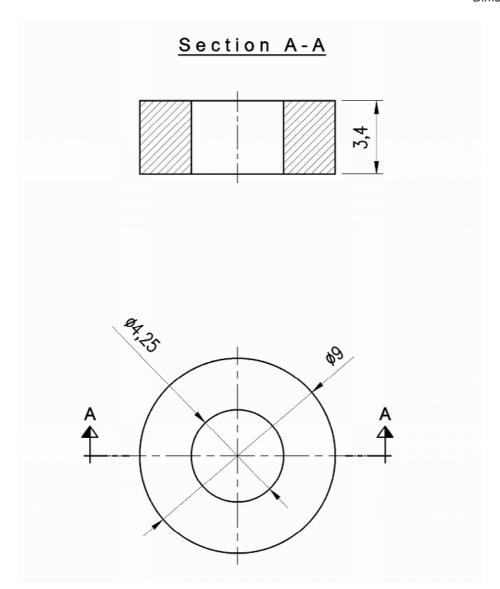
Drawing of the original left side shoulder component and the modification to it
